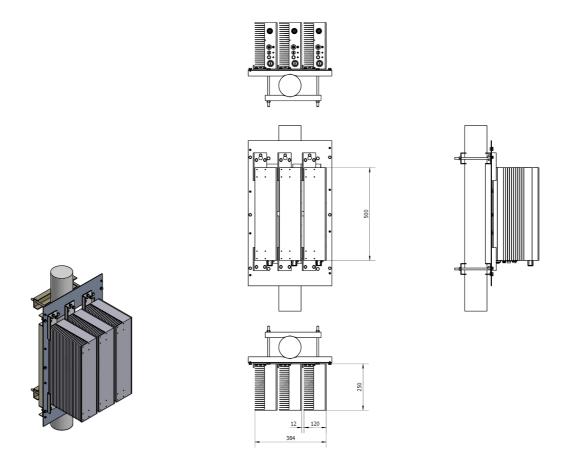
3 Remote Unit Assembly Without Solar Shell
